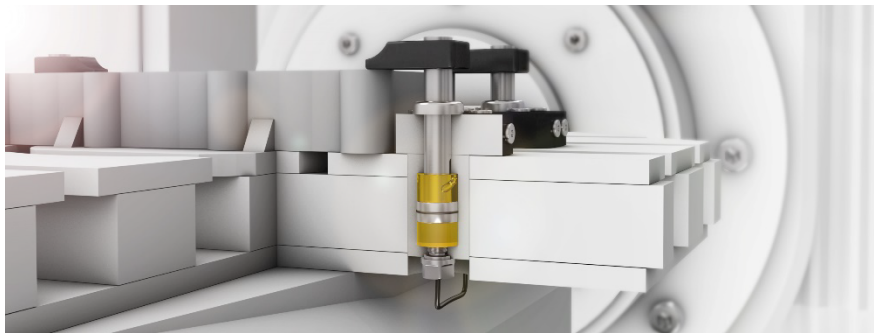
Machining center: Two swing clamp cylinders integrated in the workbench are visible. The cylinders are in the position “clamped with workpiece”
